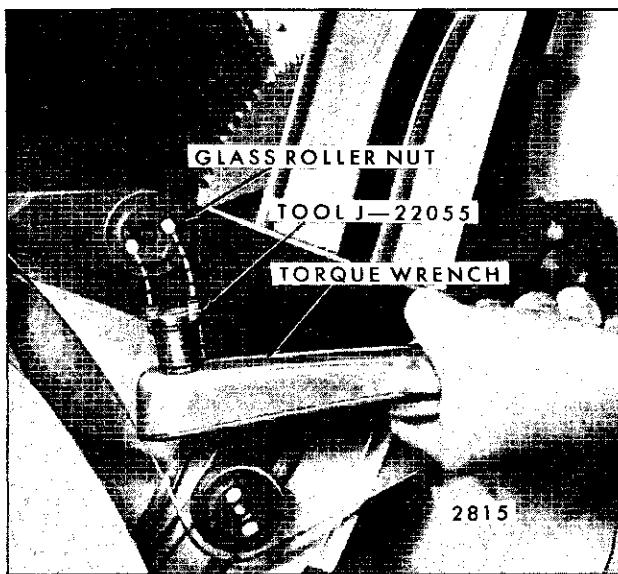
Tool J-22055 - Quarter Window Roller
